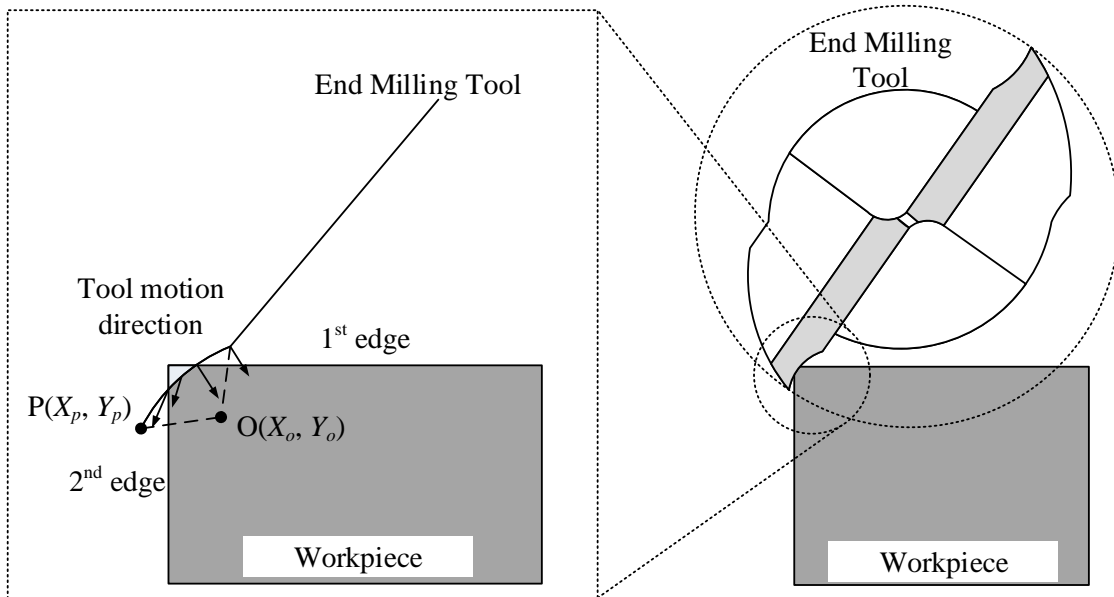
Detail of bottom view of end milling tool in down milling.
